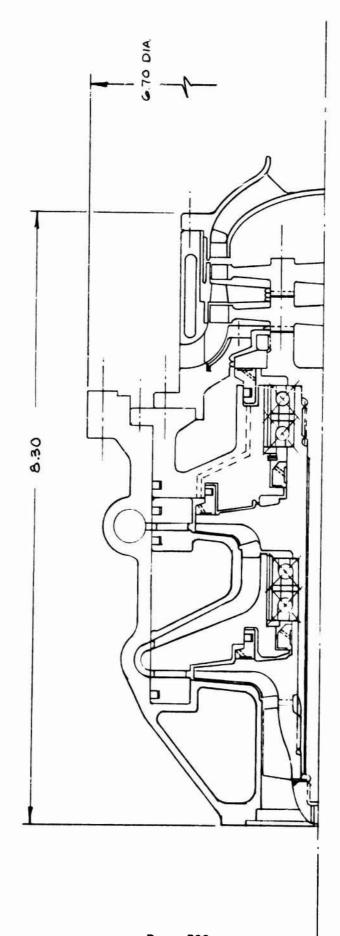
10K Fuel Turbopump Concept, V.I - Back-to-Front Unshrouded Impellers - Bearings between Stages
